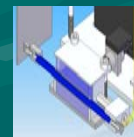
, bisected view of the STS's tube sleeve, where the heater is located.
